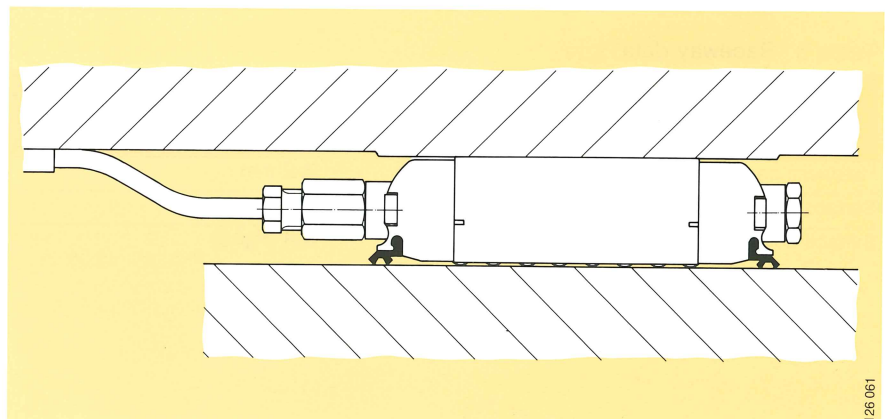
Oil feed for a linear roller bearing series RUS..KS
